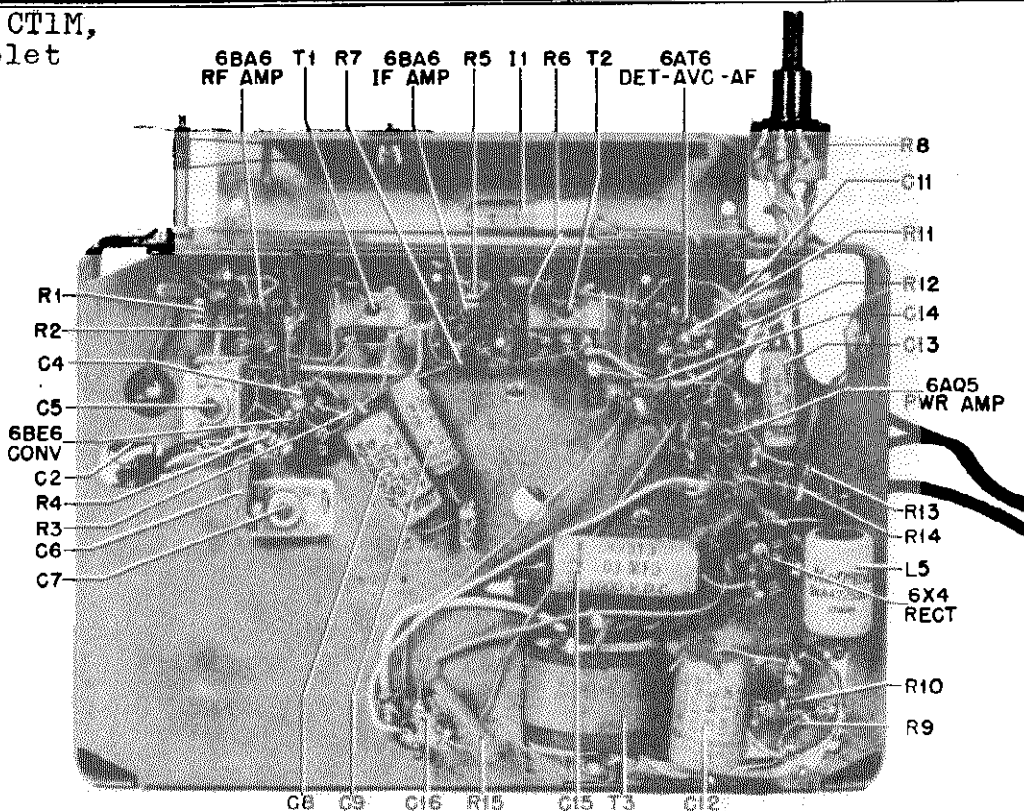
BOTTOM VIEW OF CHASSIS.
